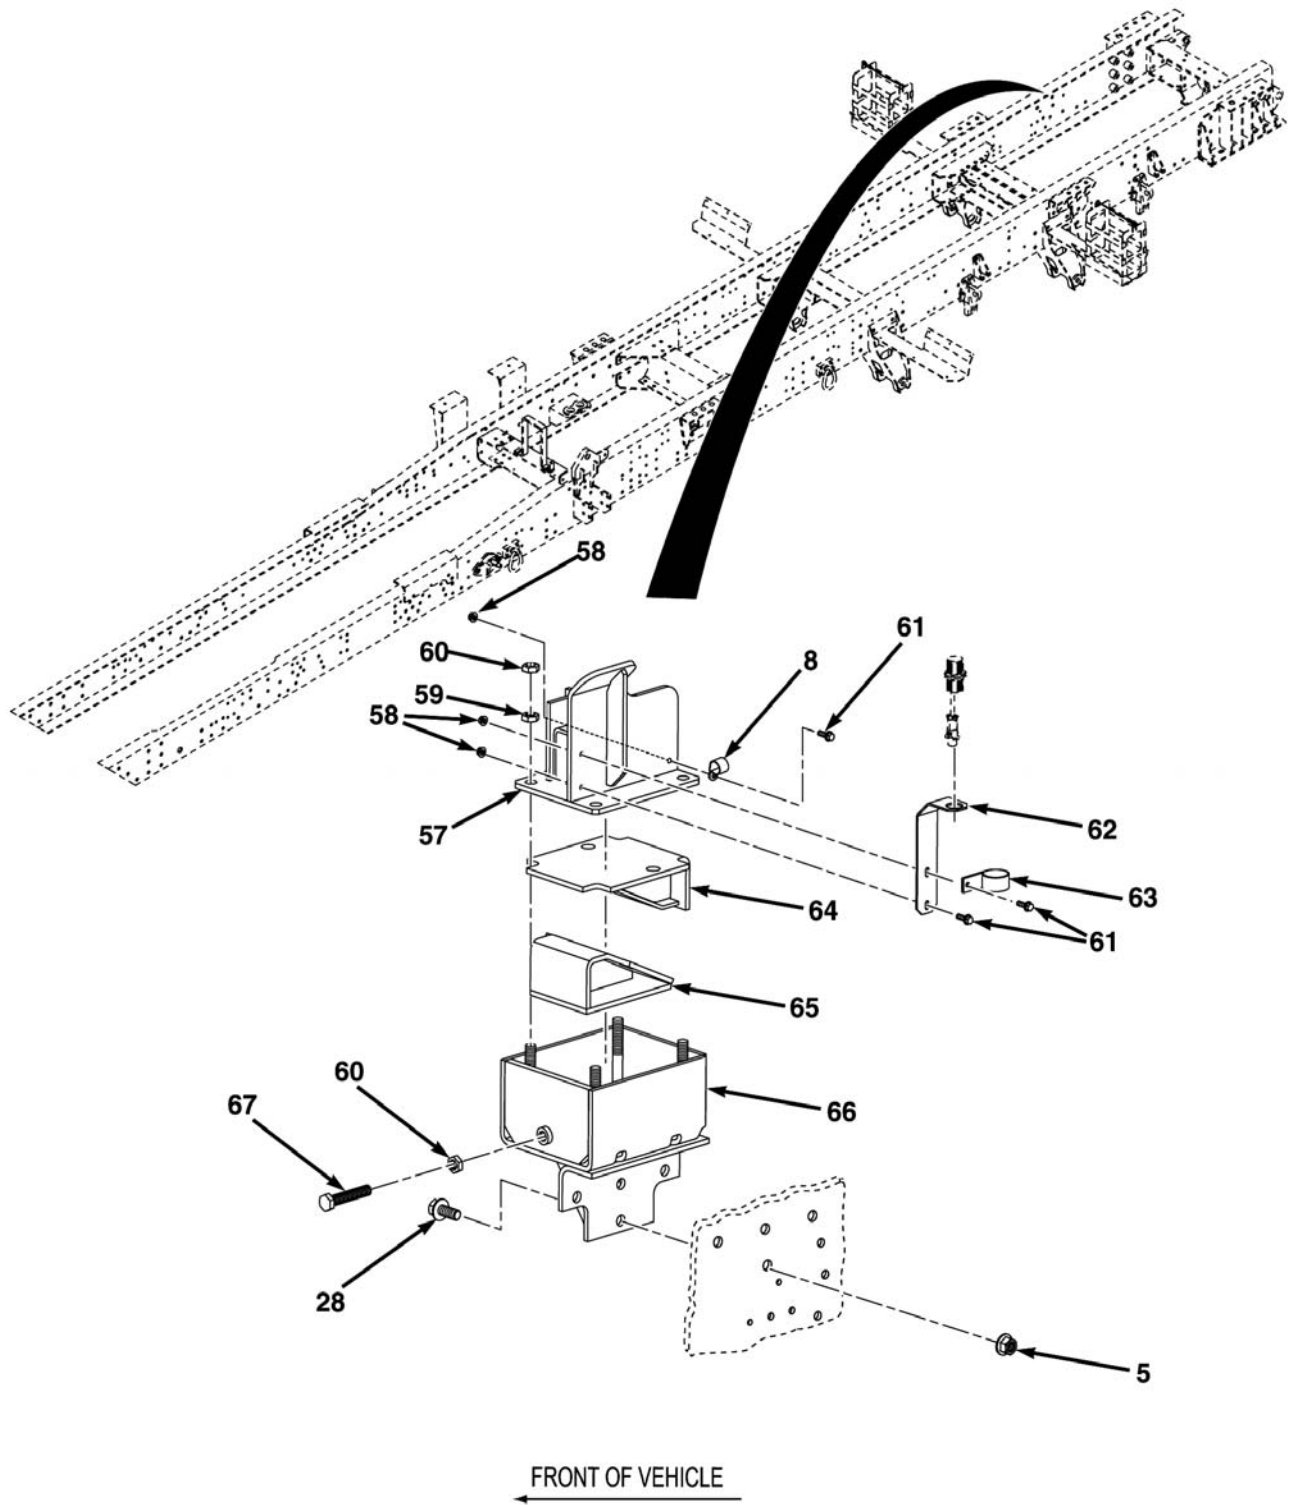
FRAME ASSEMBLY (SHEET 4 OF 5)
